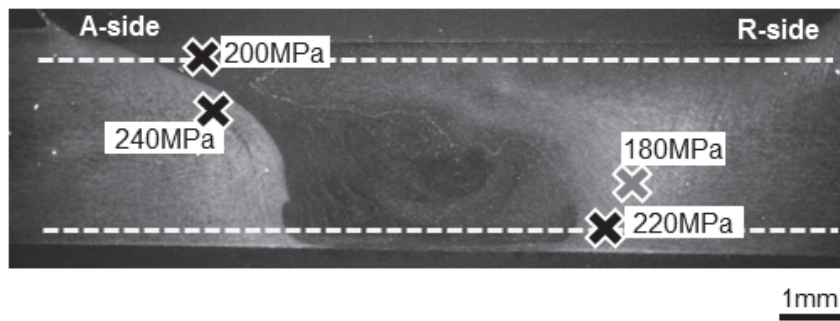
Fatigue crack initiation sites of weld-480.
